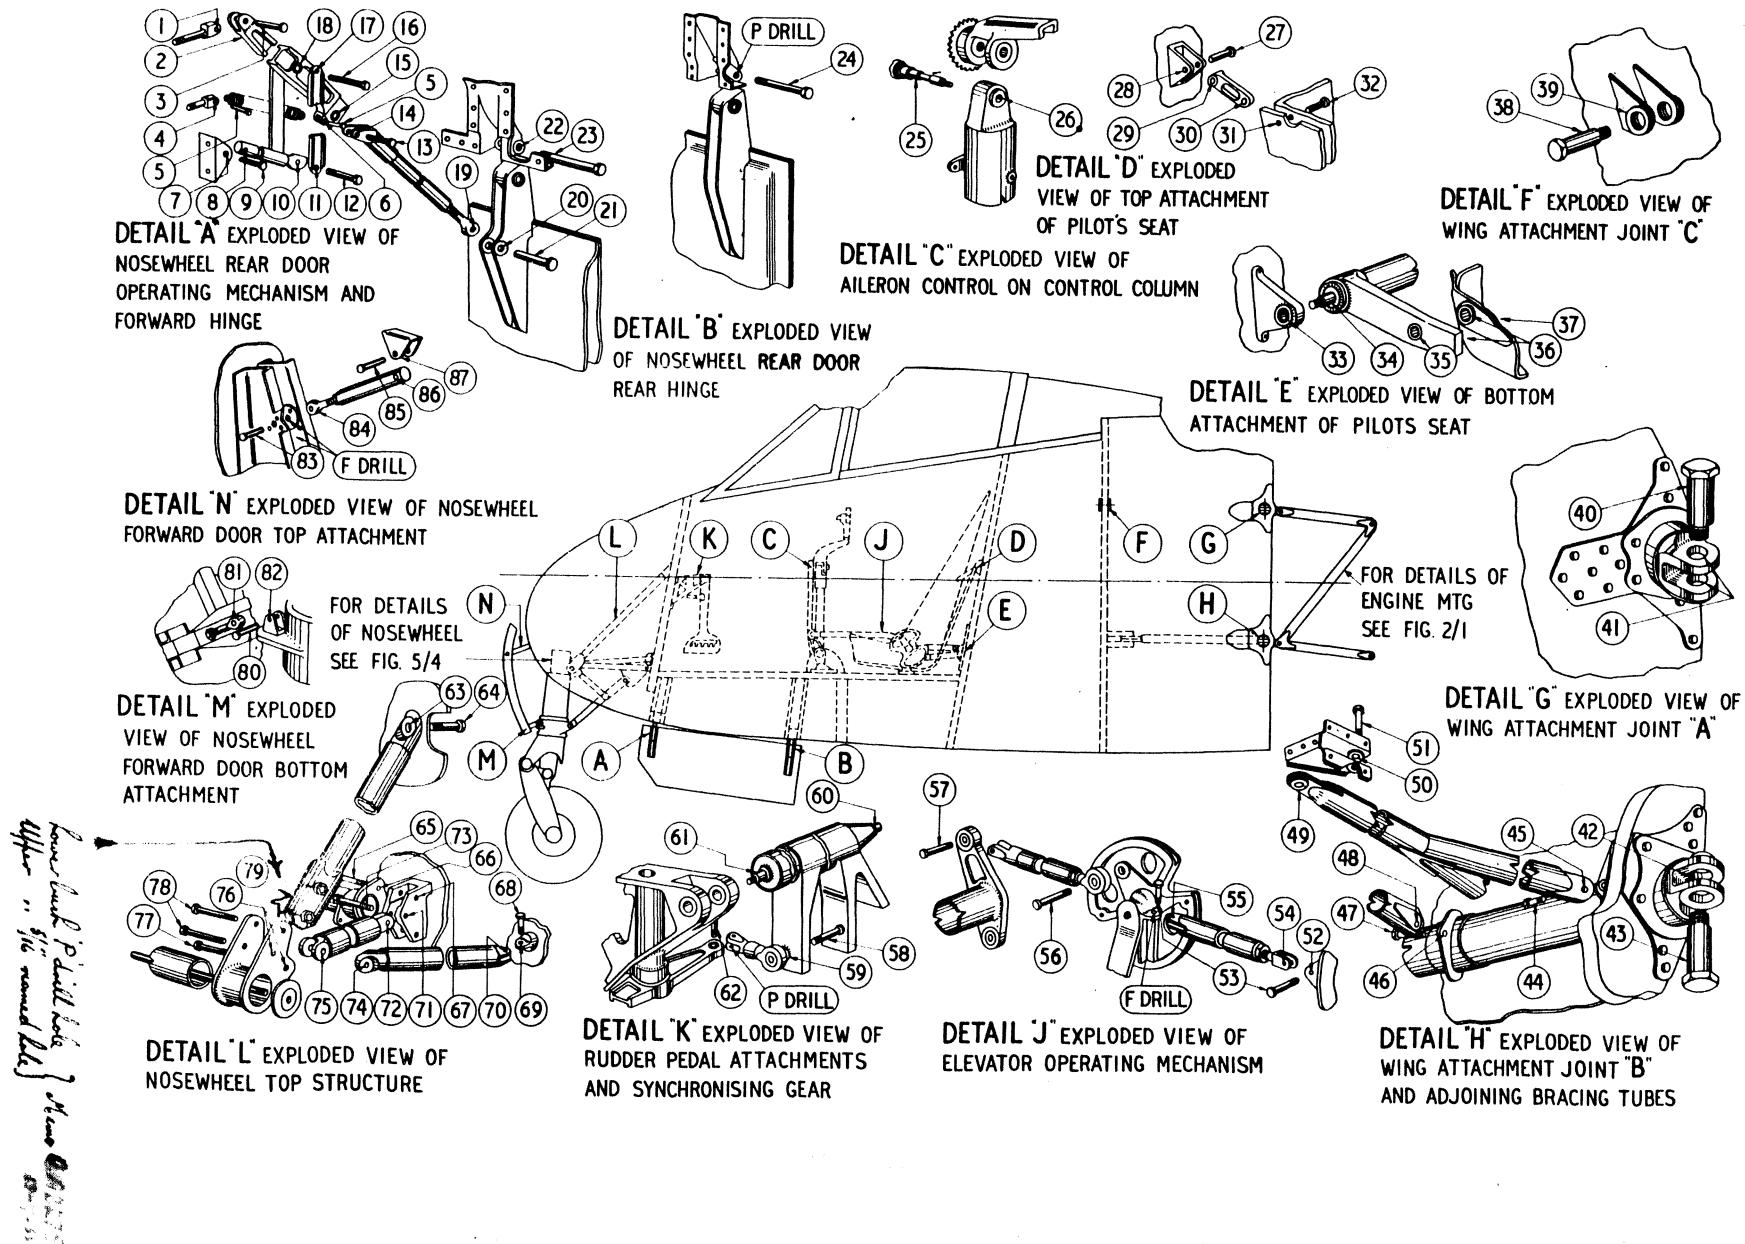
/19 EXPLODED VIEWS OF FUSELAGE FITTINGS FIG. 4/19
